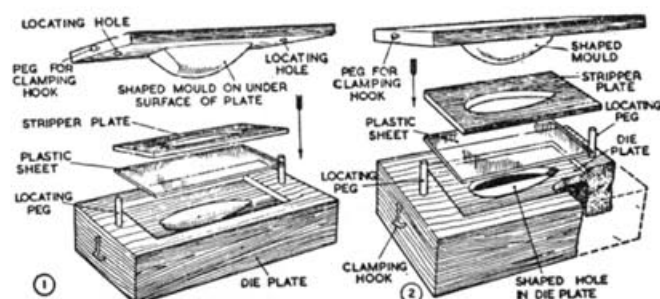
Complex method of pressure moulding used for mass production, in two ways, with female mould or hollow dieplate.
